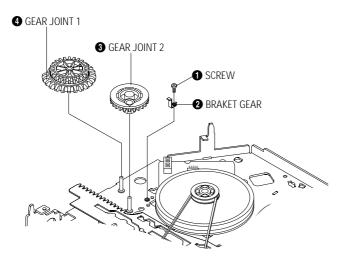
Bracket Gear, Gear Joint 1,2 Removal
